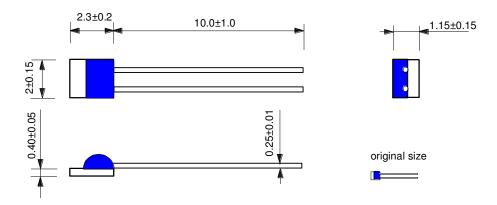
Mechanical dimensions of Platinum Temperature Sensor
